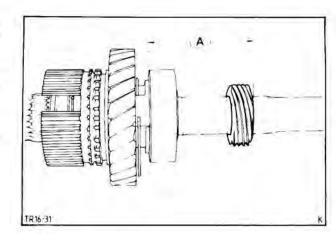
, Location of speedometer worm gear A - 82,25 mm
